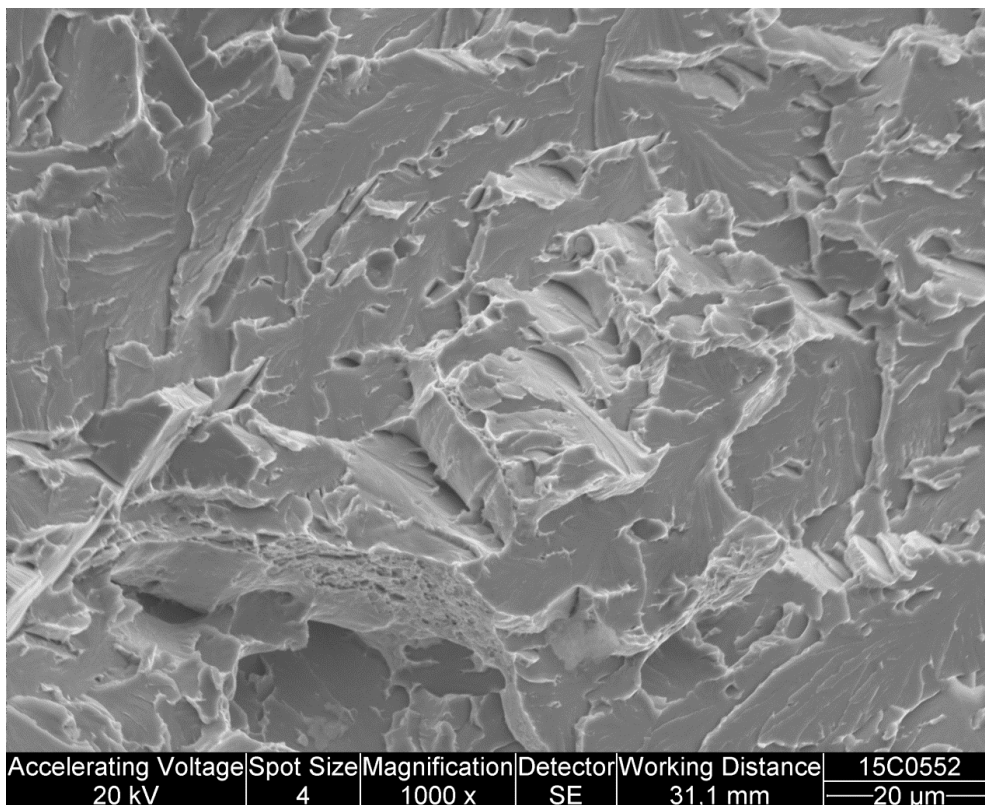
SEM image from the fracture surface of a transverse crack in the weld metal (specimen no 1.2).
